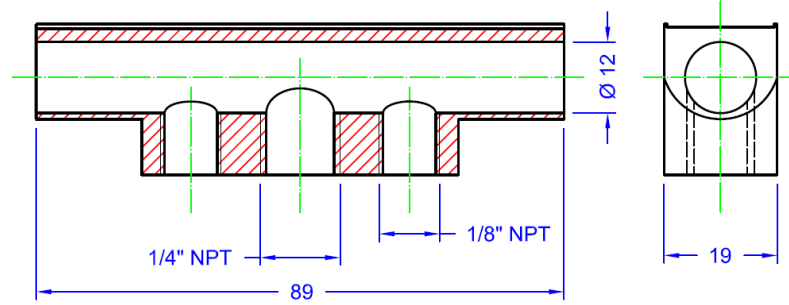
Cross-sectional view of the T-shaped brass block.
